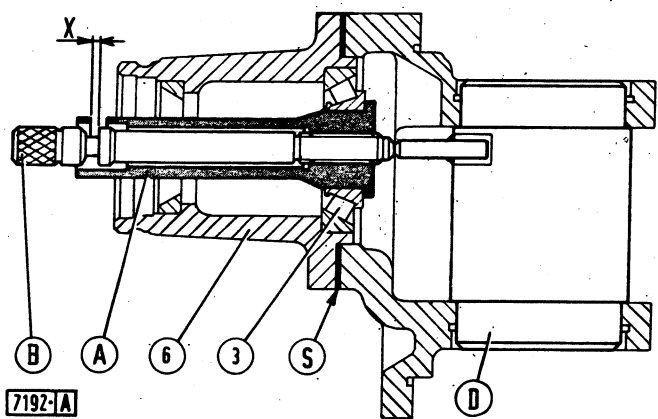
Finding the correct shimming value (S_4 , Fig.5) for bevel gear pinion location using special tool 292502 (292506).
